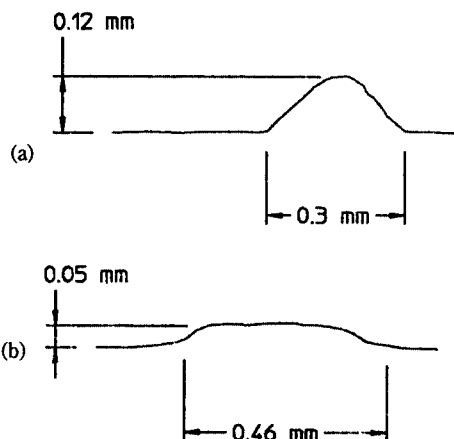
Measured cross-sectional view of the knife-edge of Helicoflex seals.
